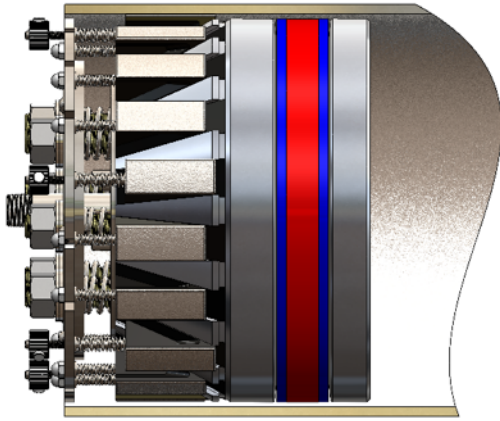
GripSafe ST ORB Auto-Locking Minimum Insertion Depth in a Sectioned Pipe
